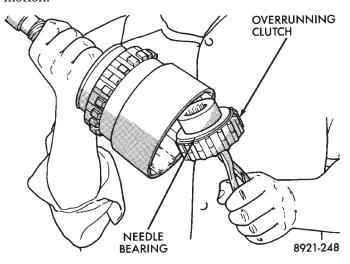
Overrunning Clutch Assembly Removal/ Installation
